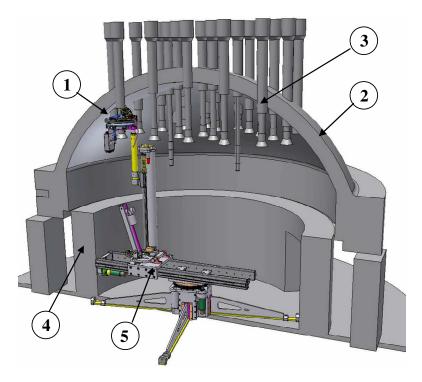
RPVH inspection area and positioning of the ARG manipulator on a nozzle penetration of the reactor pressure vessel head. 1 – ARG manipulator, 2 – RPVH cladding, 3 – CRDM nozzle penetration, 4 – RPV head is placed on a examination stand during the inspection, 5 – LIN Manipulator used for remote positioning of the ARG manipulator module on a nozzle penetration
